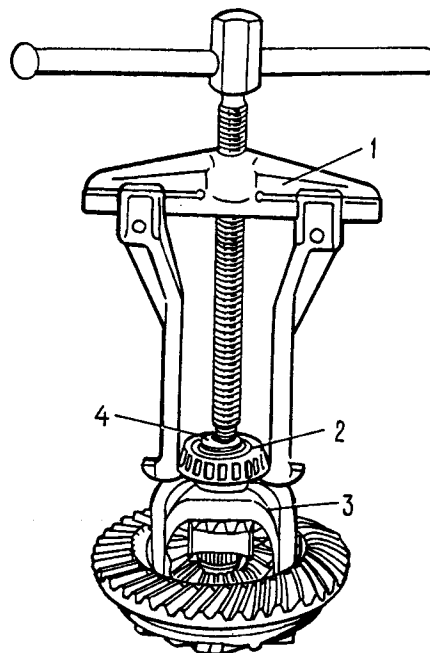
Removing Inner Cone of Differential Case Bearing with General-Purpose Remover Tool A.40005/1/6:
